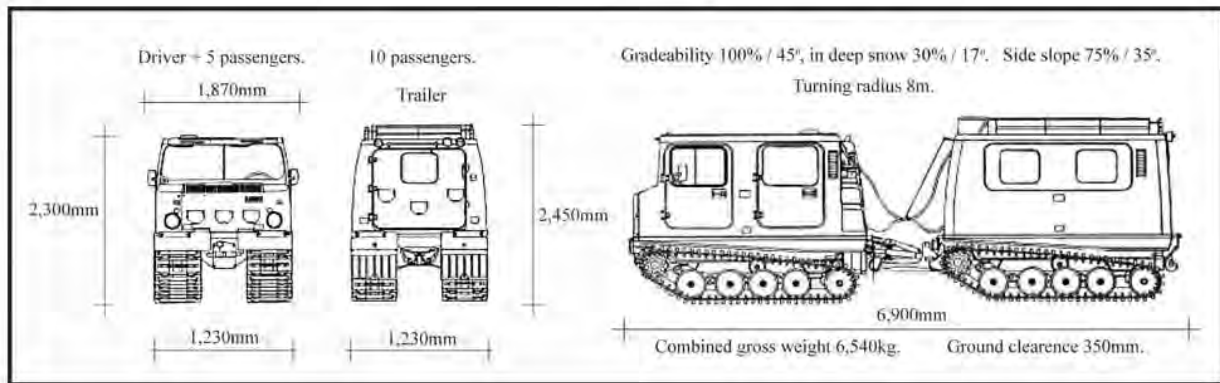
Specifications of Hagglund BV206 proposed to be used for site access.
